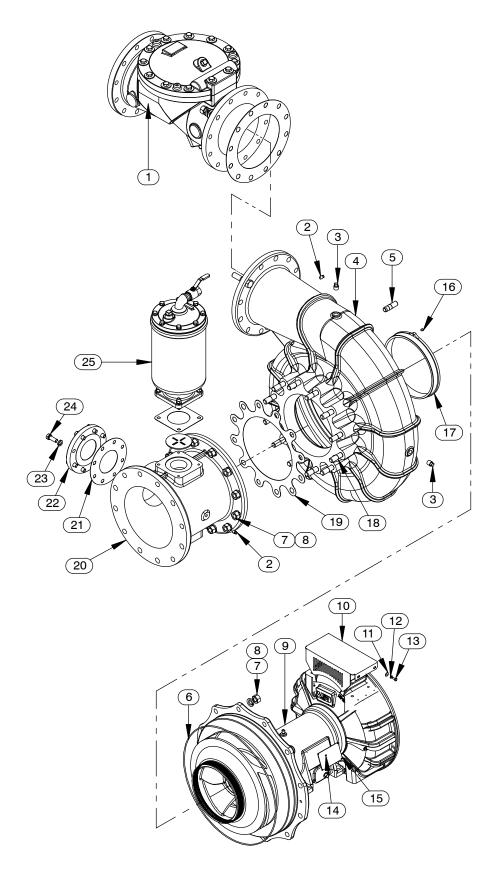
PAH10B60-(SAE 1/14) Pump End Assembly
